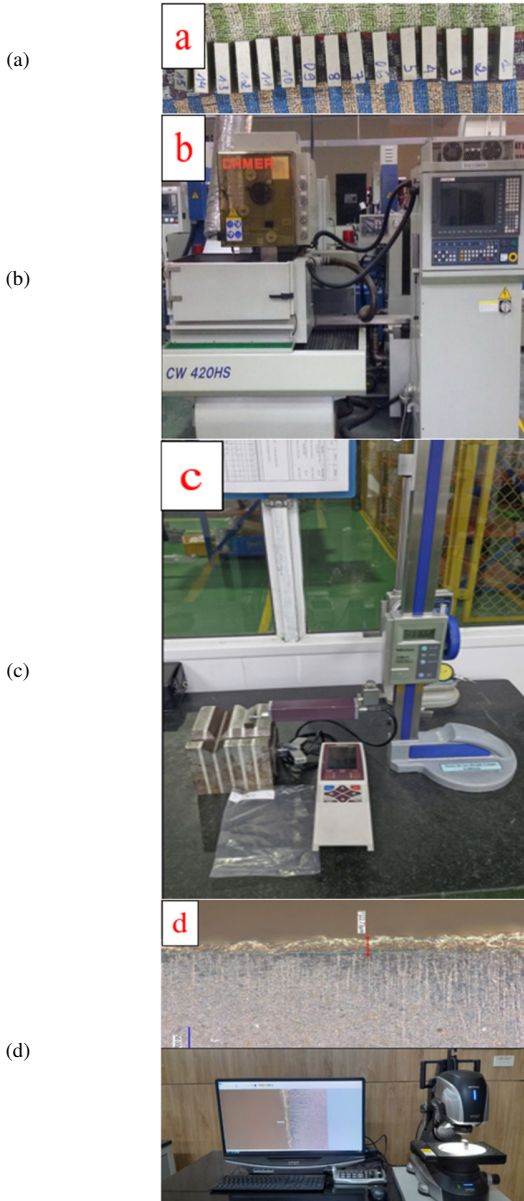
Experimental system: (a) components, (b) CHMER CW 420HS wire-cut machine, (c) surface roughness tester, (d) VHX 7000 digital microscope.
